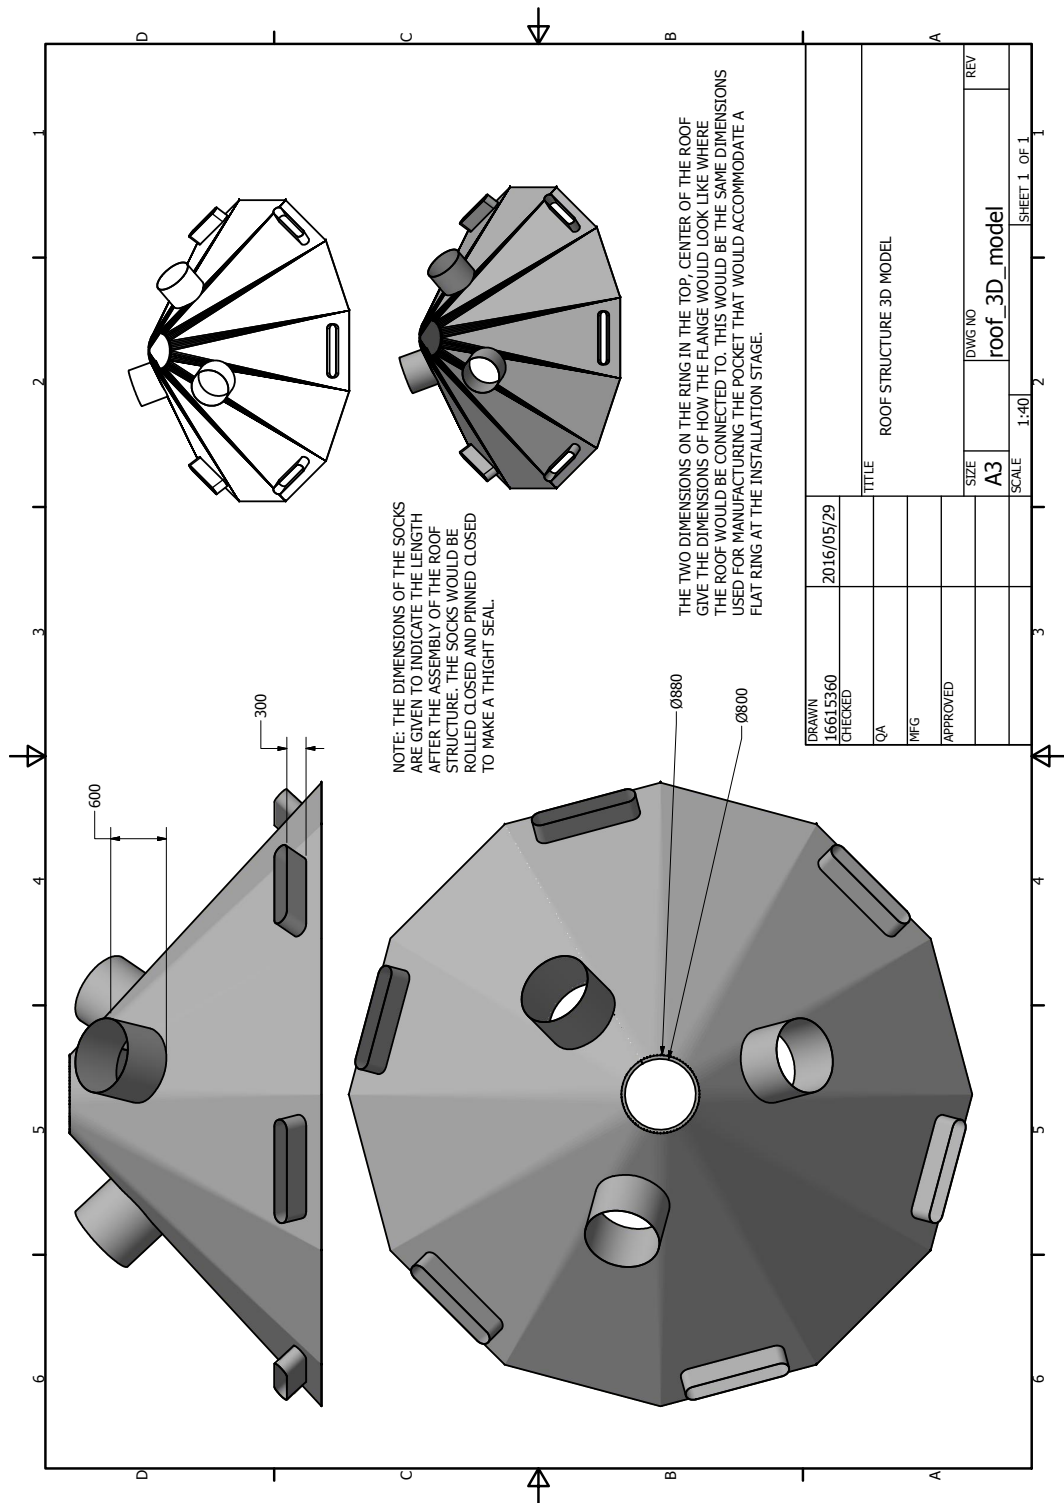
Tarpaulin cover drawing indicating the position of the ventilation holes
